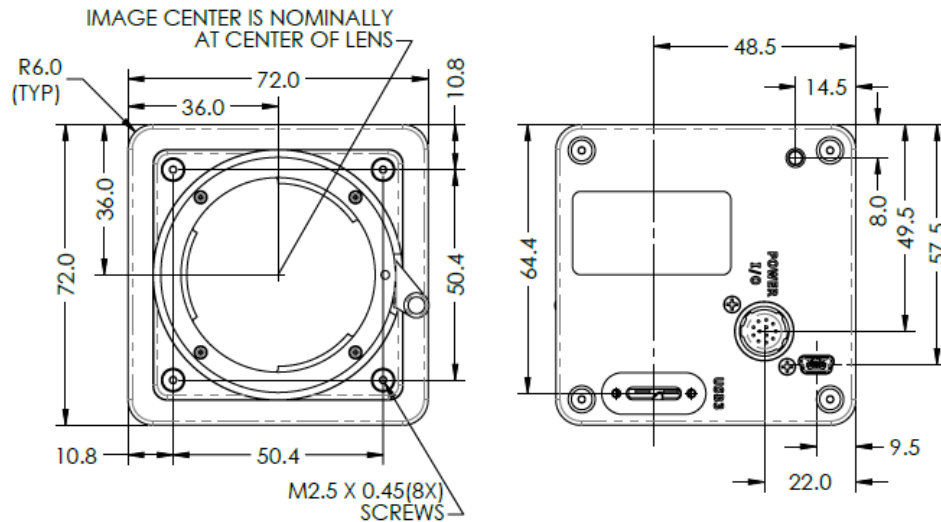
C5180, C4181, C4180 Mechanical Drawings.
